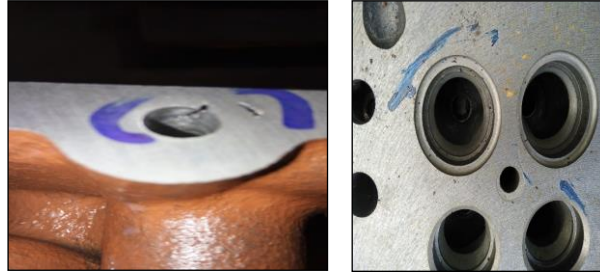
Shrinkage porosity in cylinder head castings visible during machining of cylinder head castings
